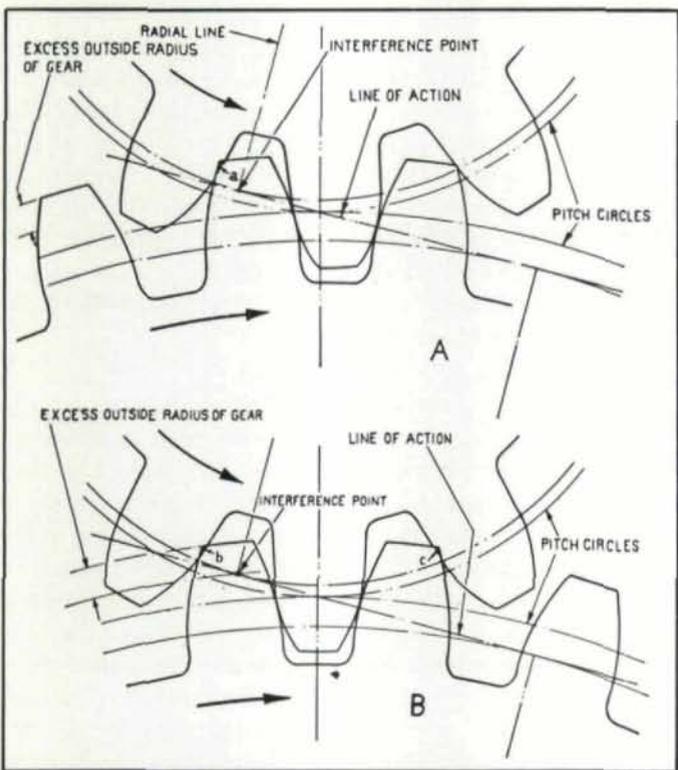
Diagram Illustrating Term Known as Involute Interference. Gear Tooth Contacts Non-Involute Portion of Pinion Tooth Outside the Zone of Contact.
